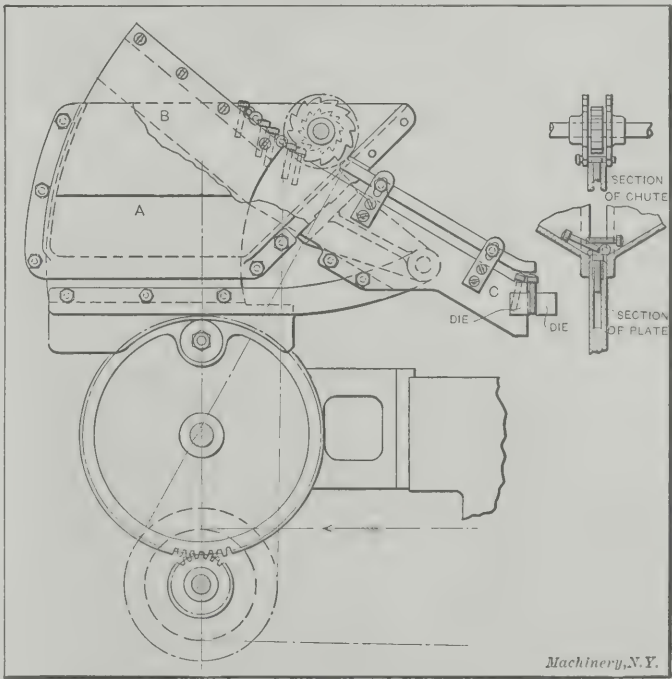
Automatic Feeding or Hopper Mechanism for Screw Blanks in Thread Rolling Machines
